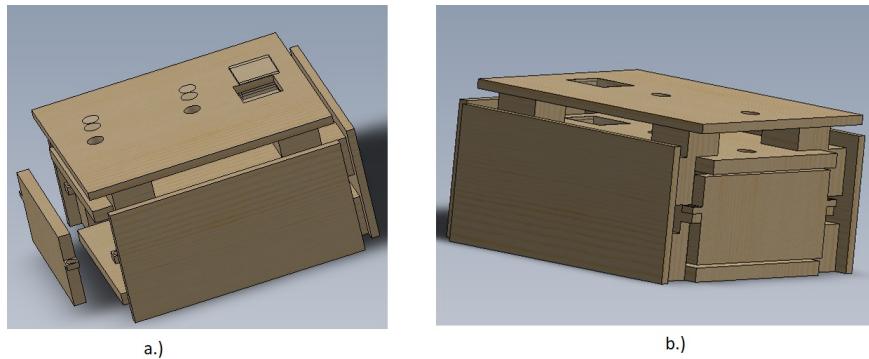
Model of the enclosure a.)Deconstructed view b.)Fully constructed view
